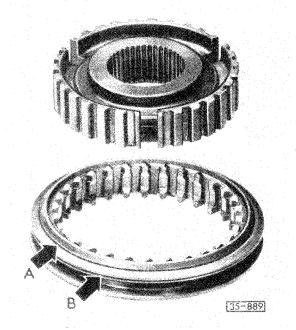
Synchronizer 2nd/3rd gear, assembling
